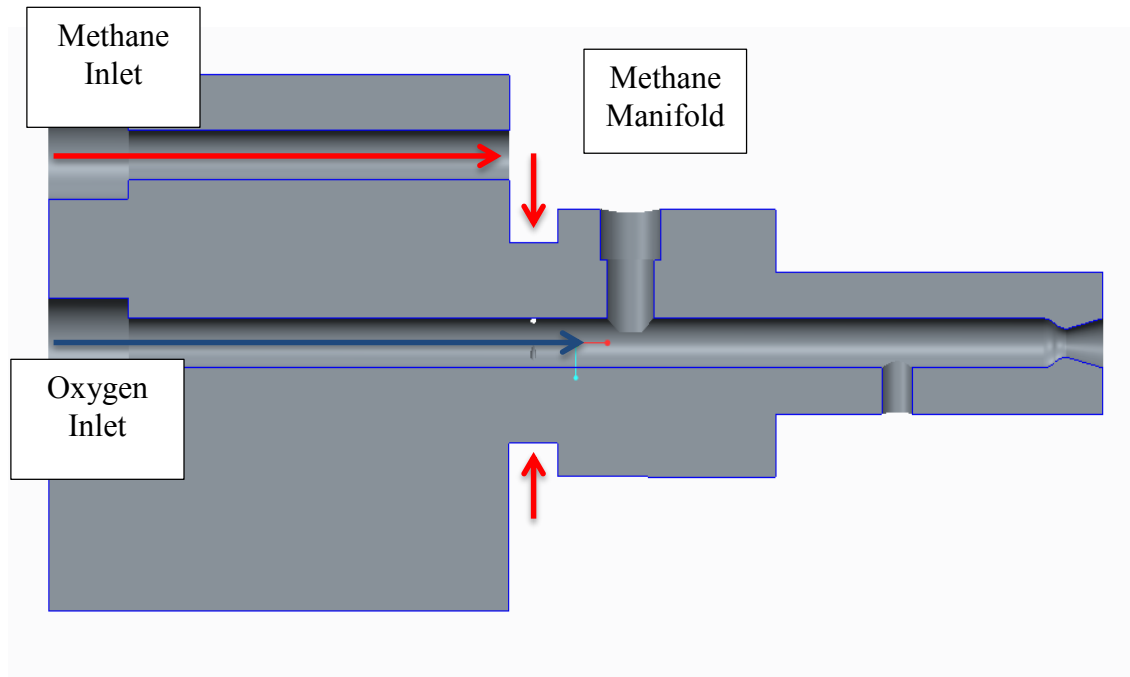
Swirl Torch Igniter Cross-Sectional View
